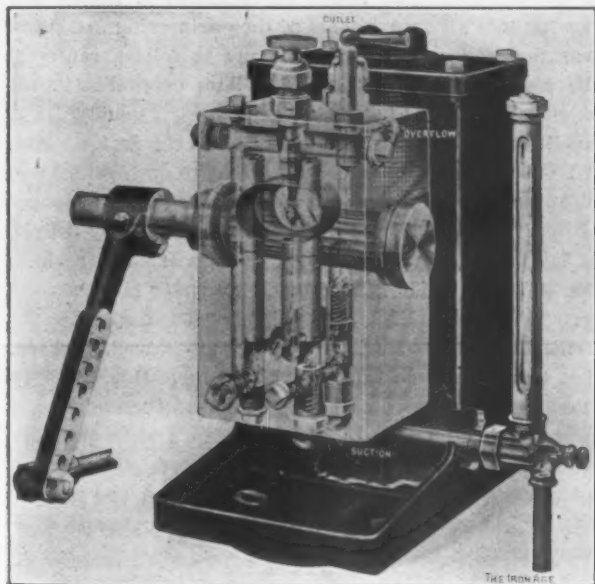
Phantom View of the Sight Feed Oil Pump Complete.
